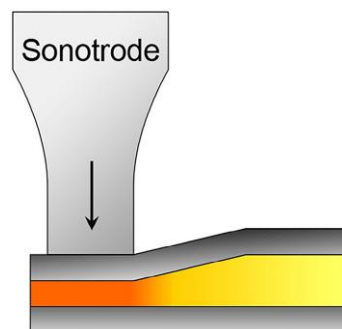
Unmolten resin in front of the weld during a CUW process[20]
